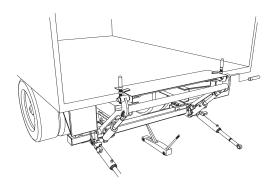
Position the support frame as required under the truck's chassis frame. eg
